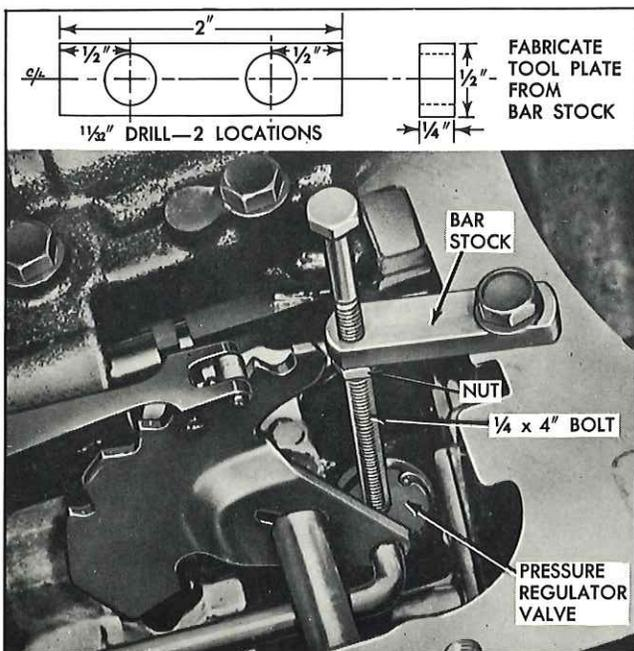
Removing Pressure Regulator Valve, using Special Tool
